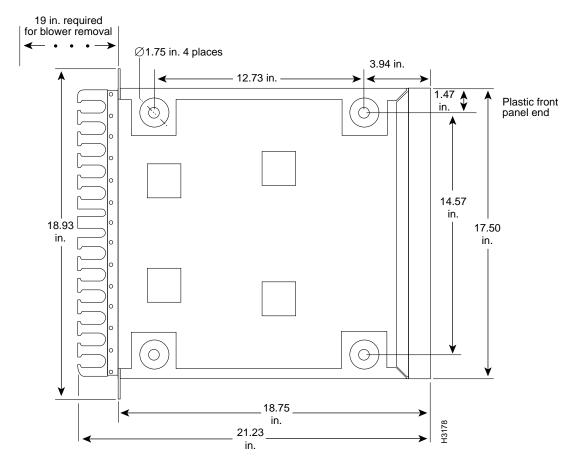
Chassis Footprint and Outer Dimensions (Cisco 7513, Cisco 7513-MX, and Cisco 7576)
